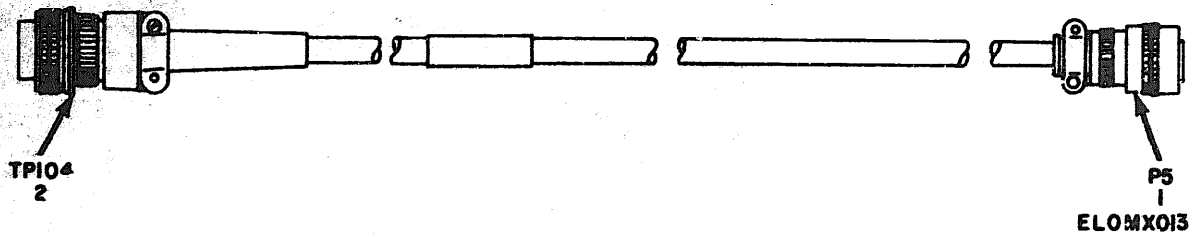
Cable Assembly, Special Purpose, Electrical, CX-657C/ASM-63 998961-01-01 (W10).
